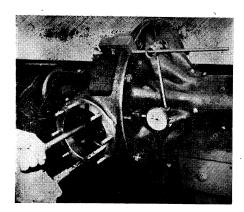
Checking differential and gear end play with dial indicator through thrust block pin hole
